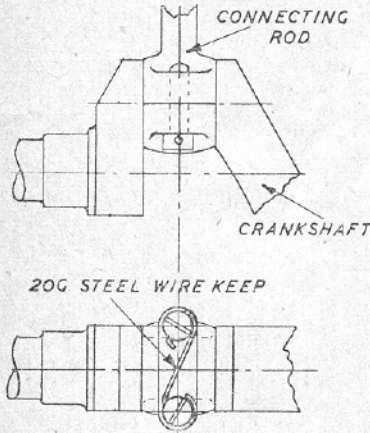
Use of steel wire keeps to secure crankpin bearing screws
